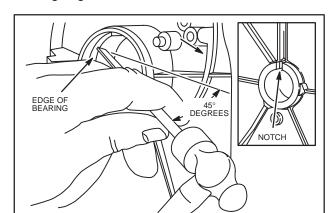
NOTCHING CYLINDER OR CRANKCASE COVER
